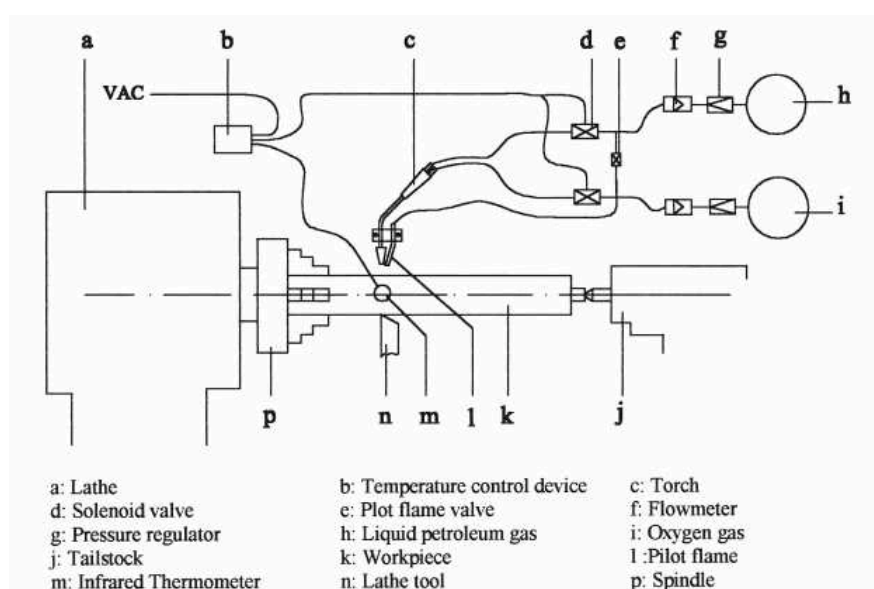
Schematic representation of a hot machining technique design (ÖZLER; İNAN; ÖZEL, 2001).
